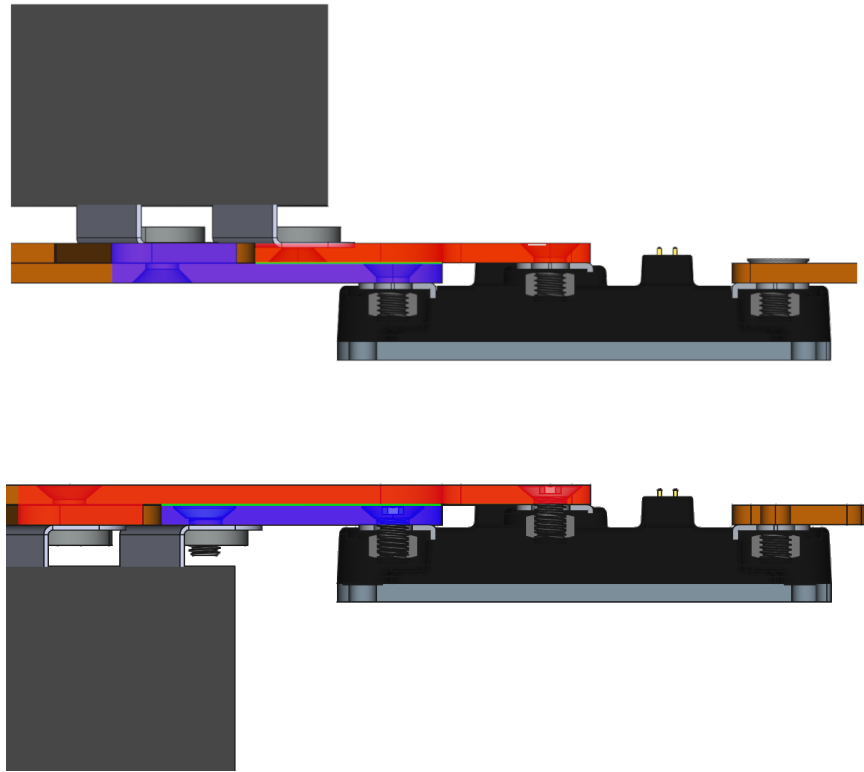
Cross Section view of DC Bussing for the prototype design (Top) and final design (Bottom)
